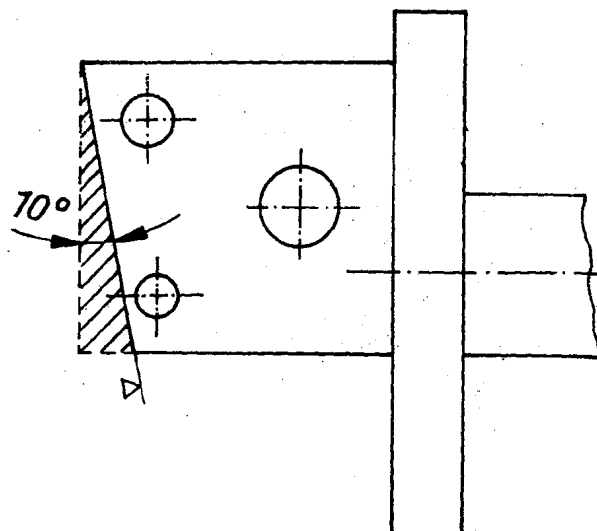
Modification of the clamping point of the assembling device 22-50.014
